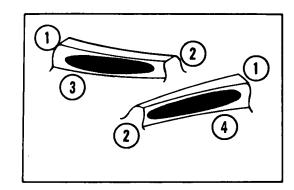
RING GEAR TOOTH PATTERN, LOADED
